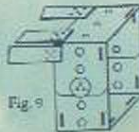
shows the use of the C-180-D connector as the pivoted end of a boom. The lower and upper connectors may be pivoted by the rope struts shown or by a rod or bolted as described in Fig. 26.
